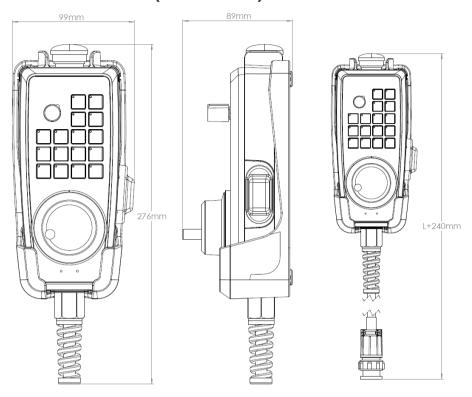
Remote Pendant Standard with Cradle Dimensions (mm)
